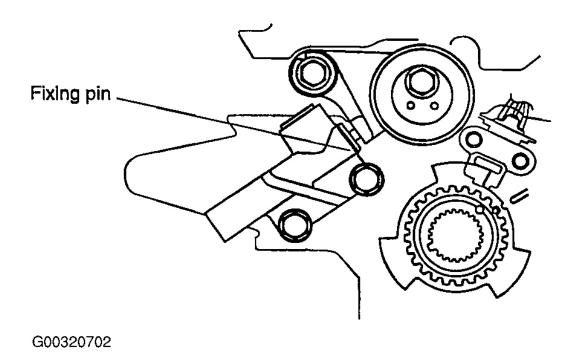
Removing Auto Tensioner Fixing Pin Courtesy of KIA MOTORS AMERICA, INC.
